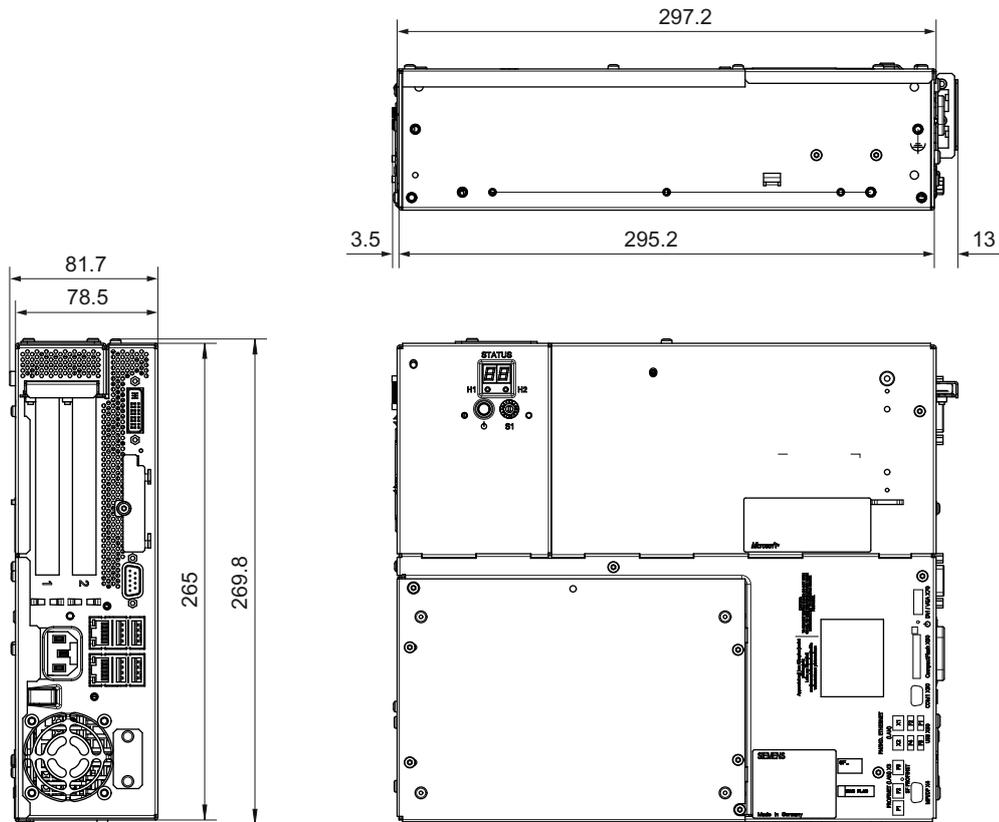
PCU 50.5 dimension drawing for mounting without ETH strain relief
